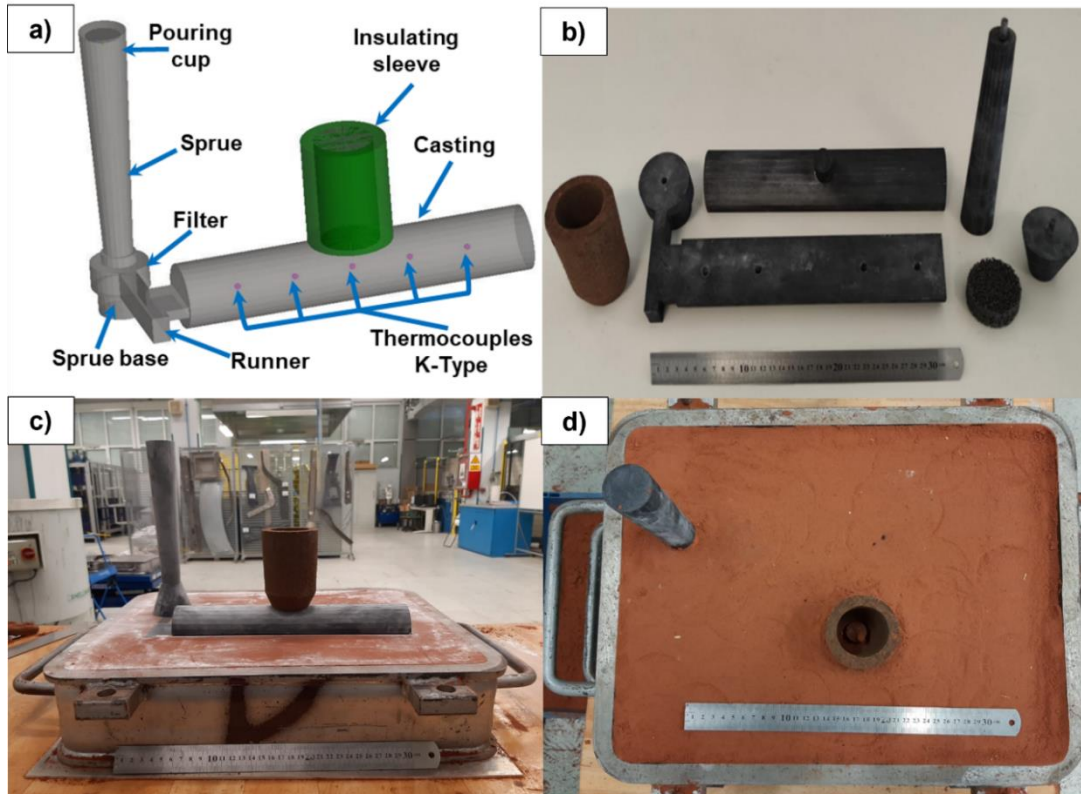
(a) CAD model of the gate and feed system designed using FLOW 3D software; (b) 3D printed mold, filter and insulating sleeve; (c) one half of the mold (cope); (d) the other half the mold(drag).
